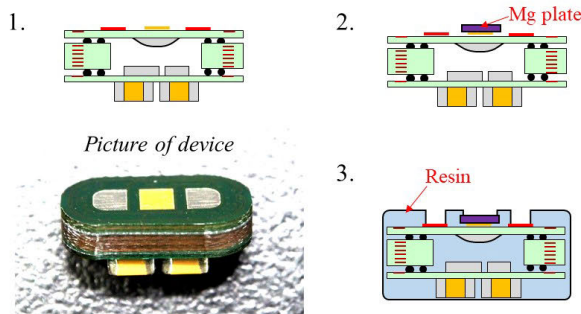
Fabrication process of the ingestible thermometer utilizing stacking of PCBs with coil patterns.
